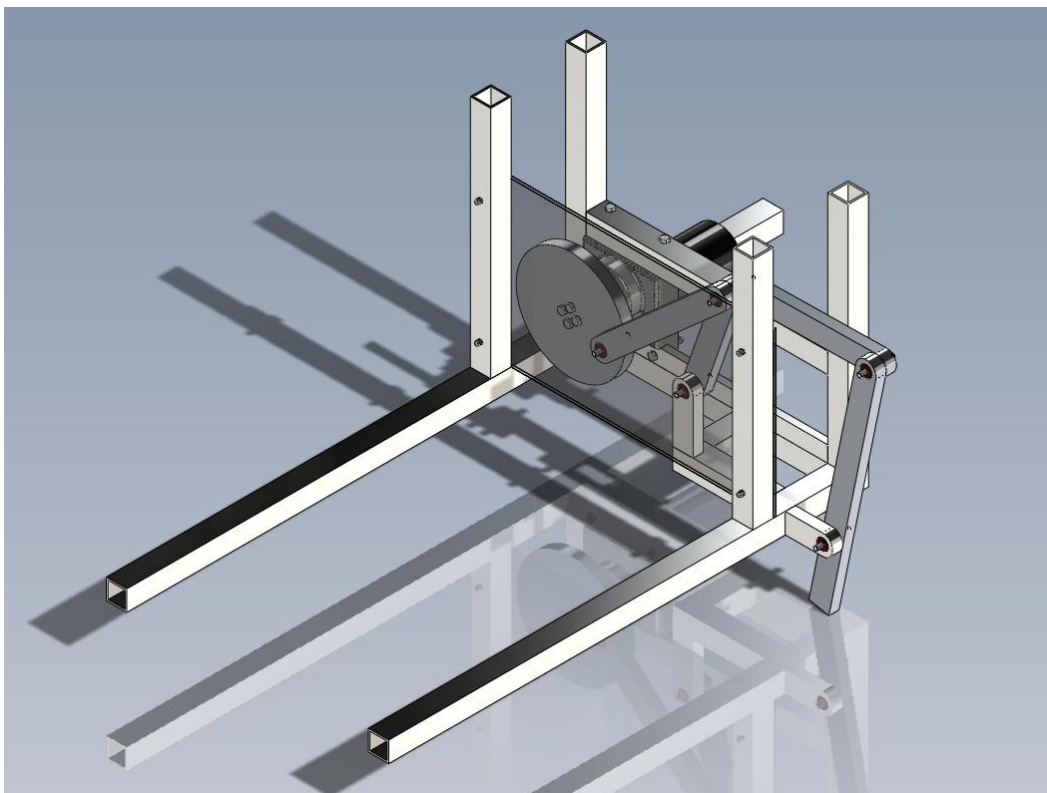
The four-bar, NPC-T64 motor, and four-bar mount assembled together.
